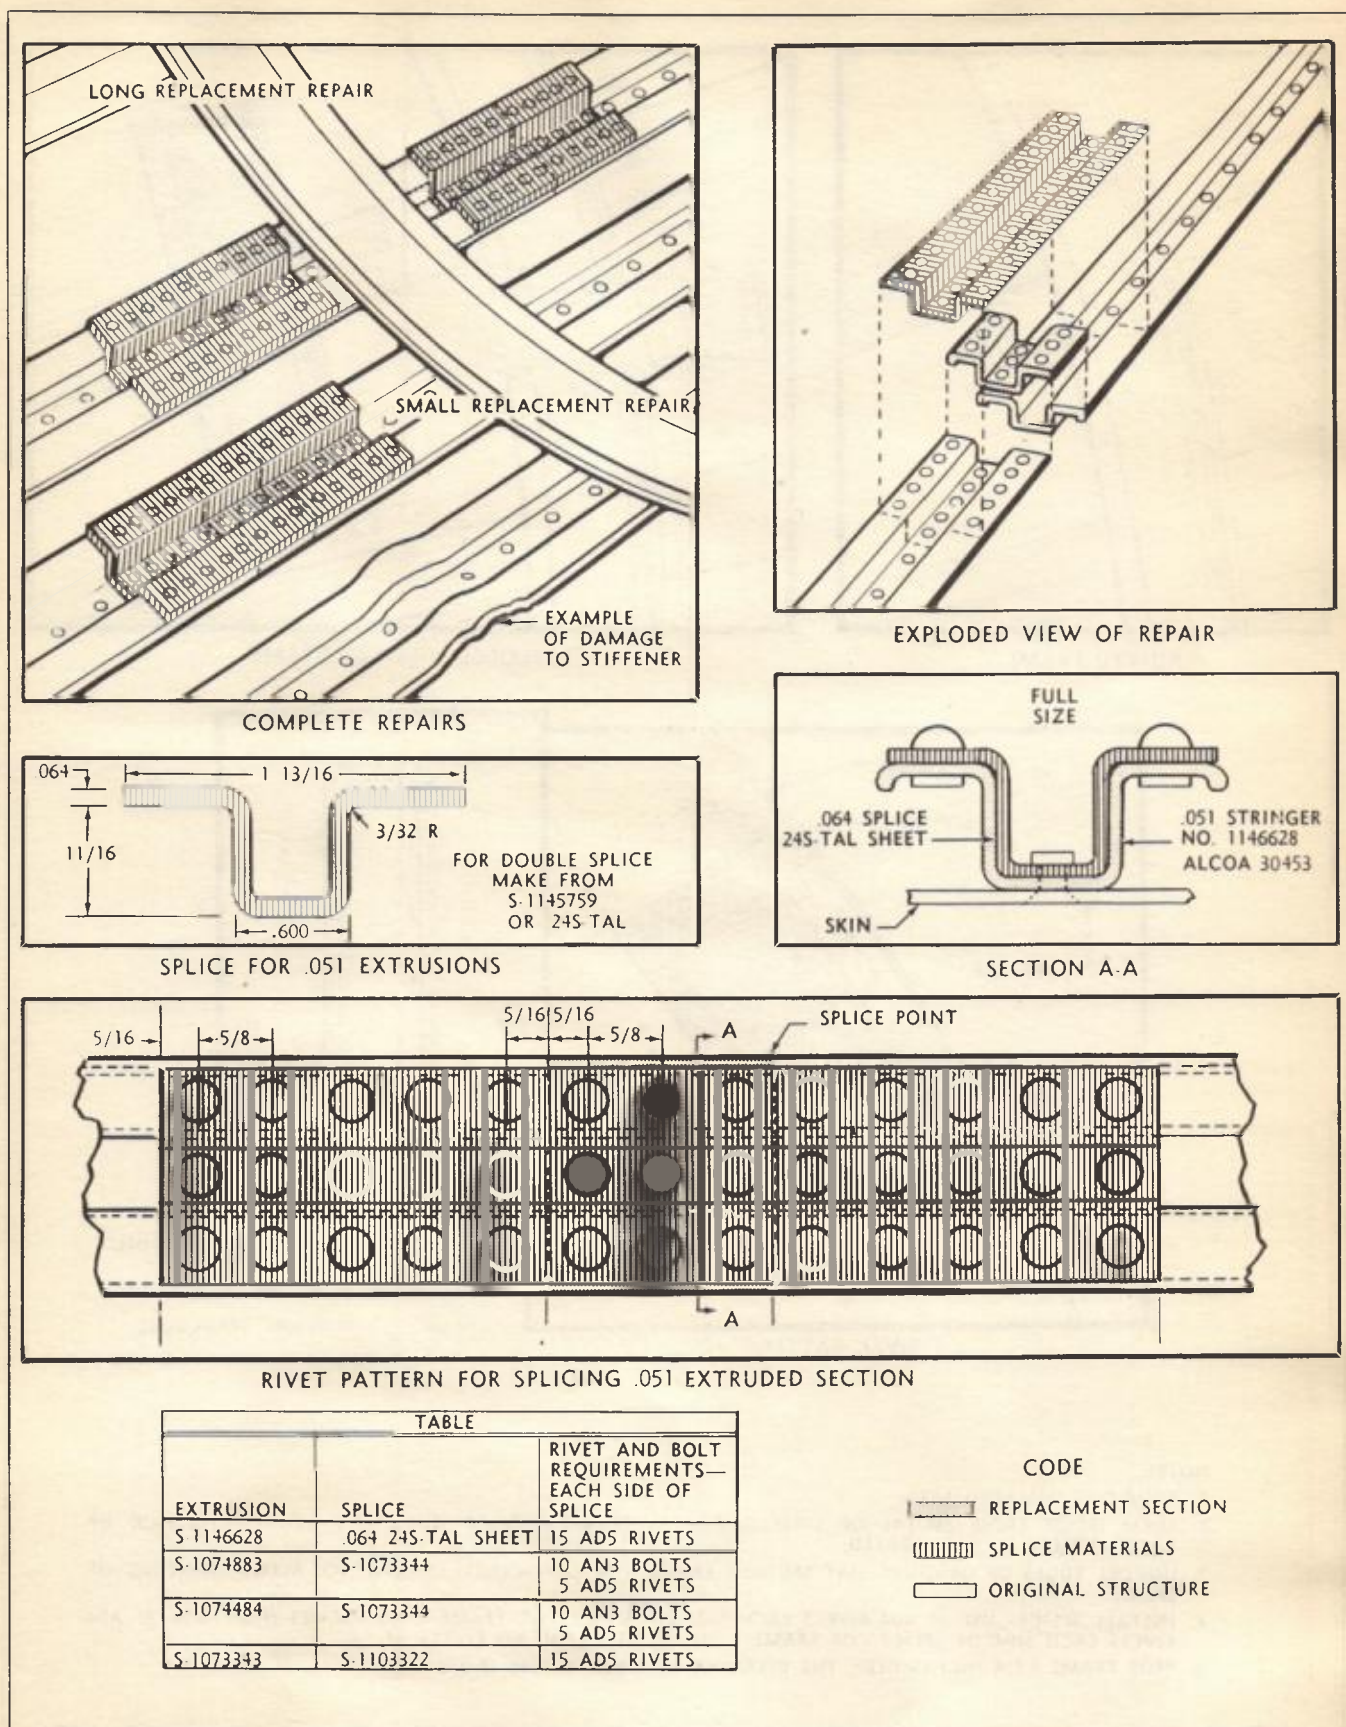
(Sheet 2 of 2 Sheets) — Fuselage Stringer Repair— Extruded Hat Section
